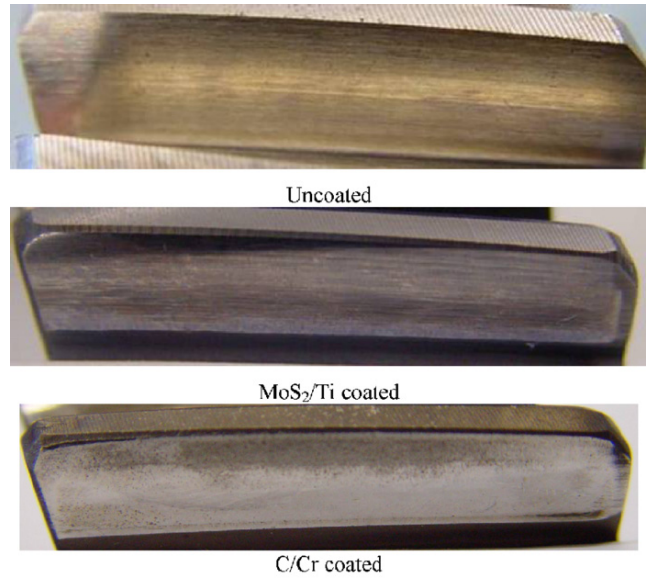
Teeth flanks of gearbox pinion no 4 after testing.
